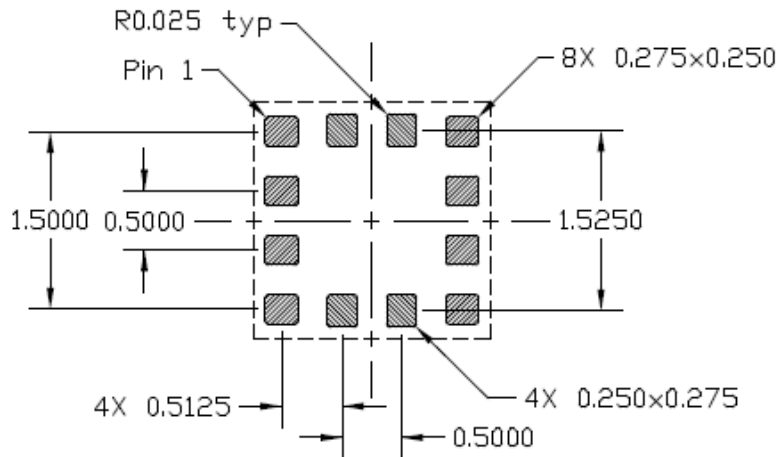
Example of a 12-pin 2 x 2 mm LGA solder stencil layout (Top view)
